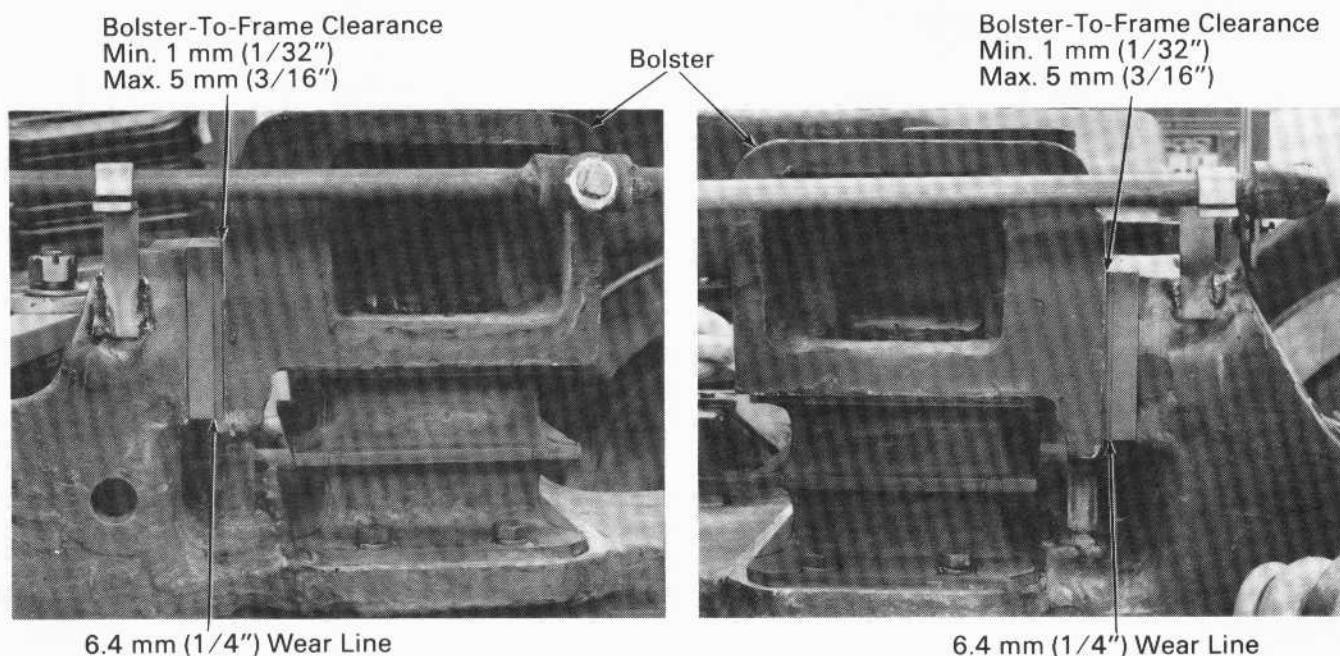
Bolster-To-Frame Contact Surface Wear Plates
